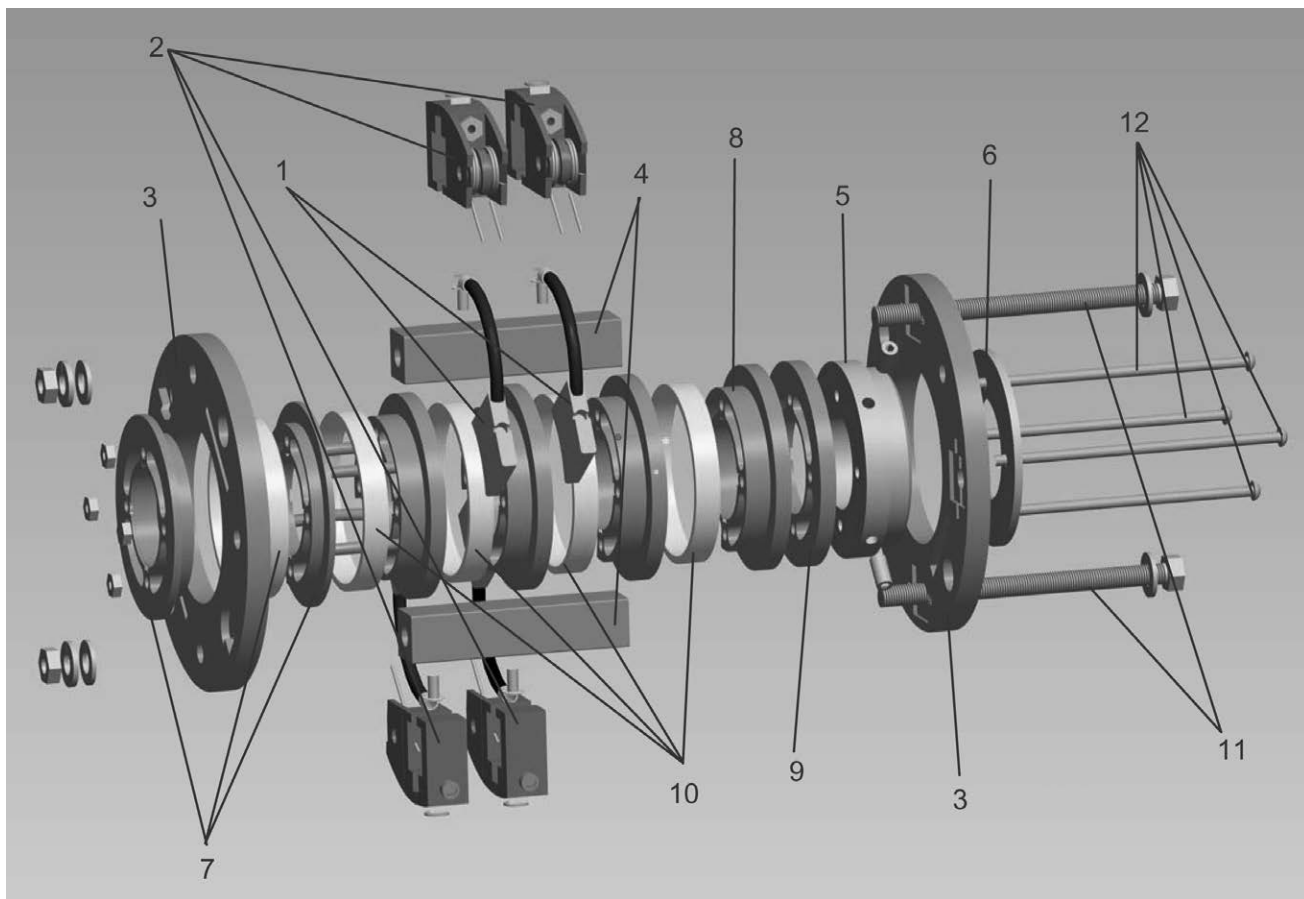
Spare Parts overview (1.5" Bore Ring show, other bore size parts may differ slightly. Contact factory for questions).
